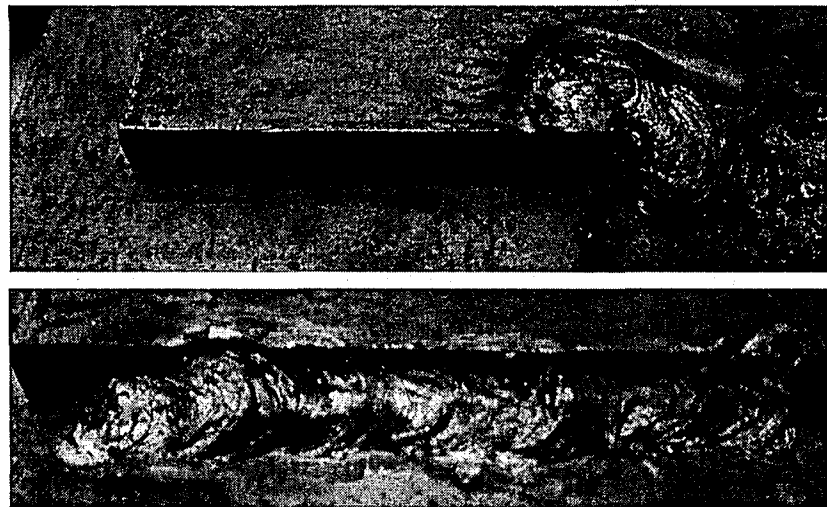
Specimen PC-5—Top Image-Incomplete Weld 1(Ice), Bottom Image-Weld 2(Ice)
